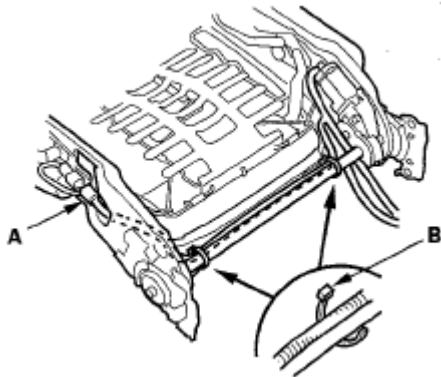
Identifying Lumbar Support Motor Connector And Wire Ties
